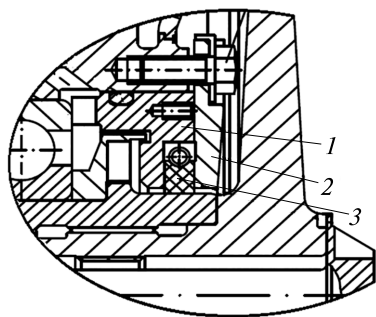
Sealing unit of the RD 861K rocket engine turbopump: 1 – seal housing, 2 – cover, 3 – graphite gas ring
